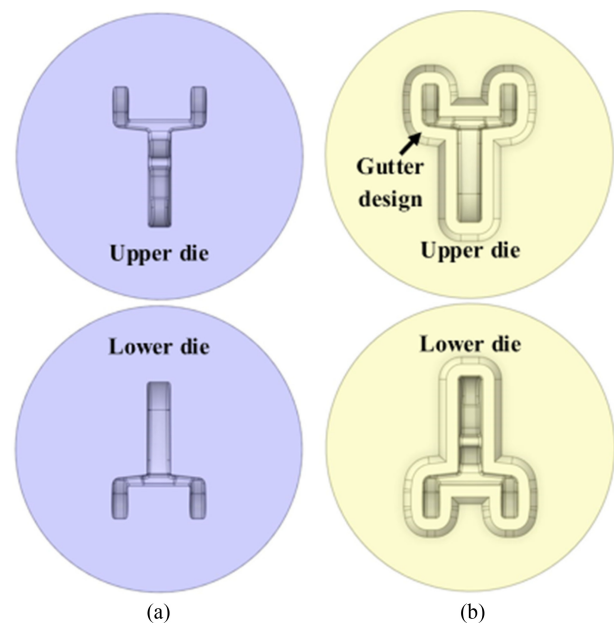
Forging die design: (a) 1st forging die and (b) 2nd and 3rd forging die
